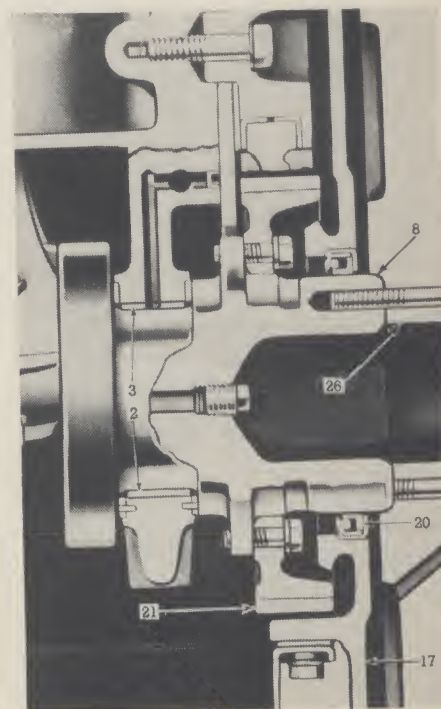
A—A GM engine showing crankshaft rear oil seal (20) which is located in flywheel housing (17). Remove flywheel to renew seal.
